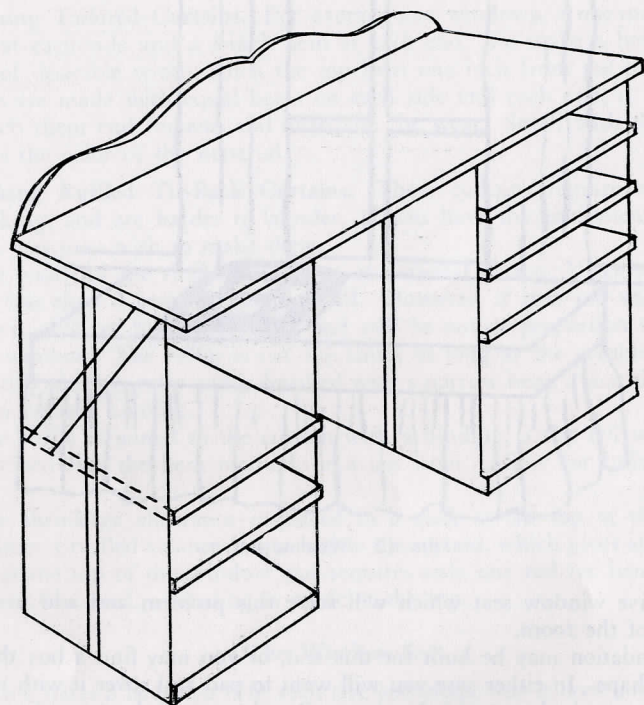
Dressing table foundation made of crates. Notice extra shelves and side bracing.
